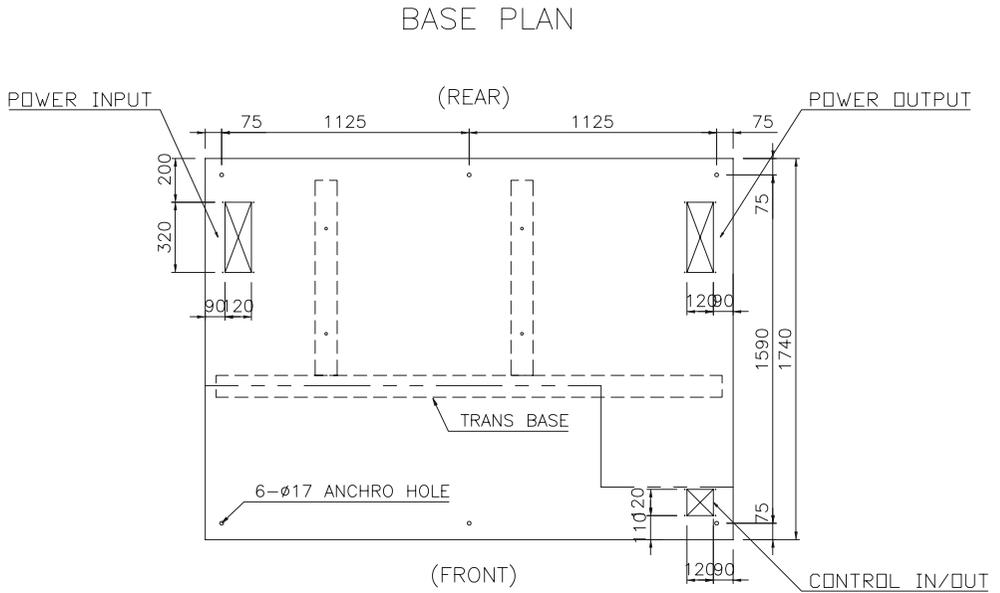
LSMV-066S600-G1 (Type A) Base Plan
